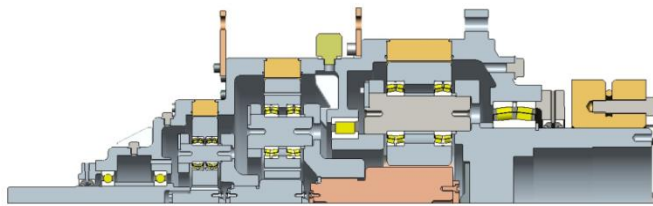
Sectional arrangement of three stage coupled planetary gearbox.
